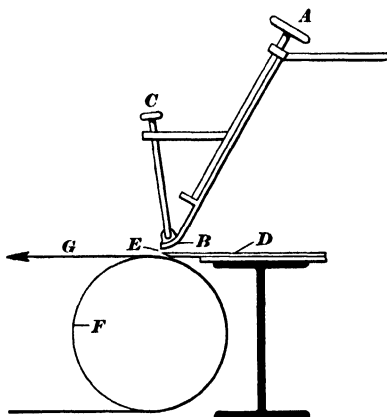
A, slice adjusting wheel; B, slice lip; C, lip-adjusting hand wheel; D, apron board; E, slice opening; F, breast roll; G, wire.
